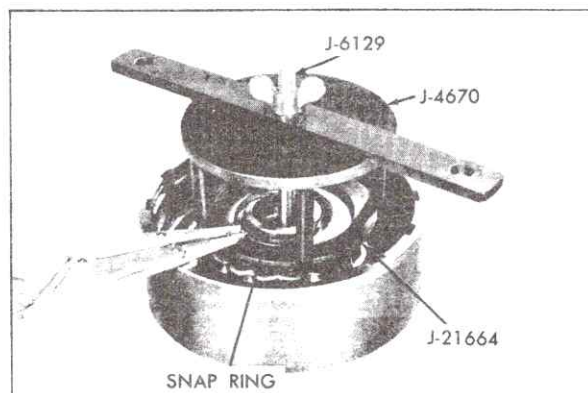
Removing and Installing Direct Clutch Housing Snap Ring
